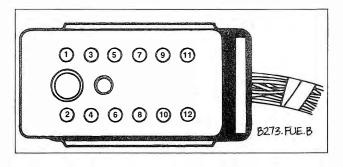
Idle speed control unit harness connector terminal identification. Terminal numbers are also printed on connector. Remove trim panel above glove compartment to access control unit.
